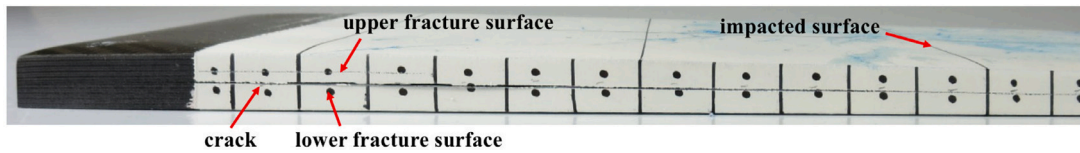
Location of the upper and lower fracture surfaces described throughout this investigation as indicated on an impacted specimen.
